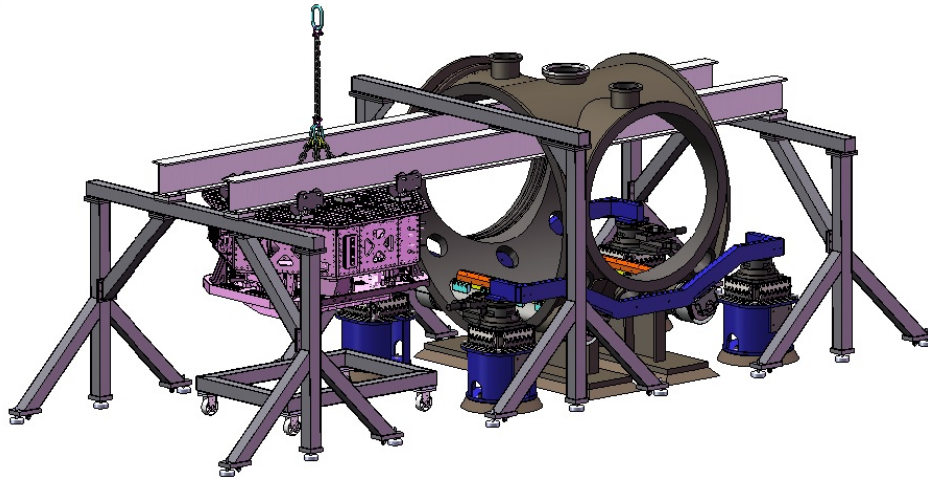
CAD view of the HAM ISI being lifted onto the rail beams of the installation fixture. Picture from [E080053].
